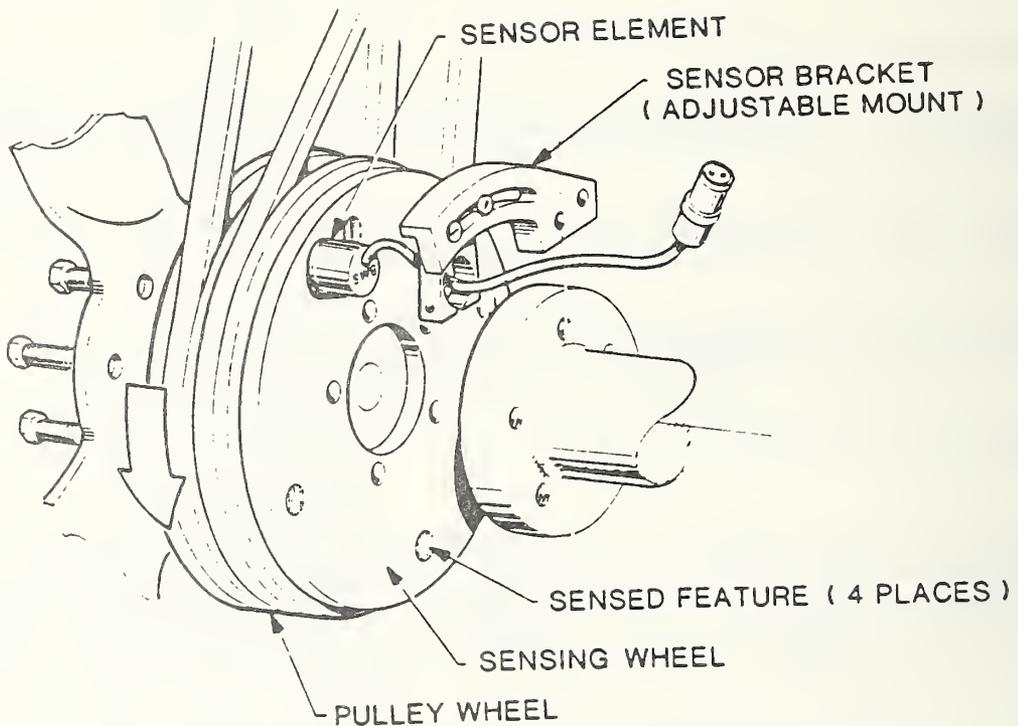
CRANKSHAFT POSITION SENSOR
